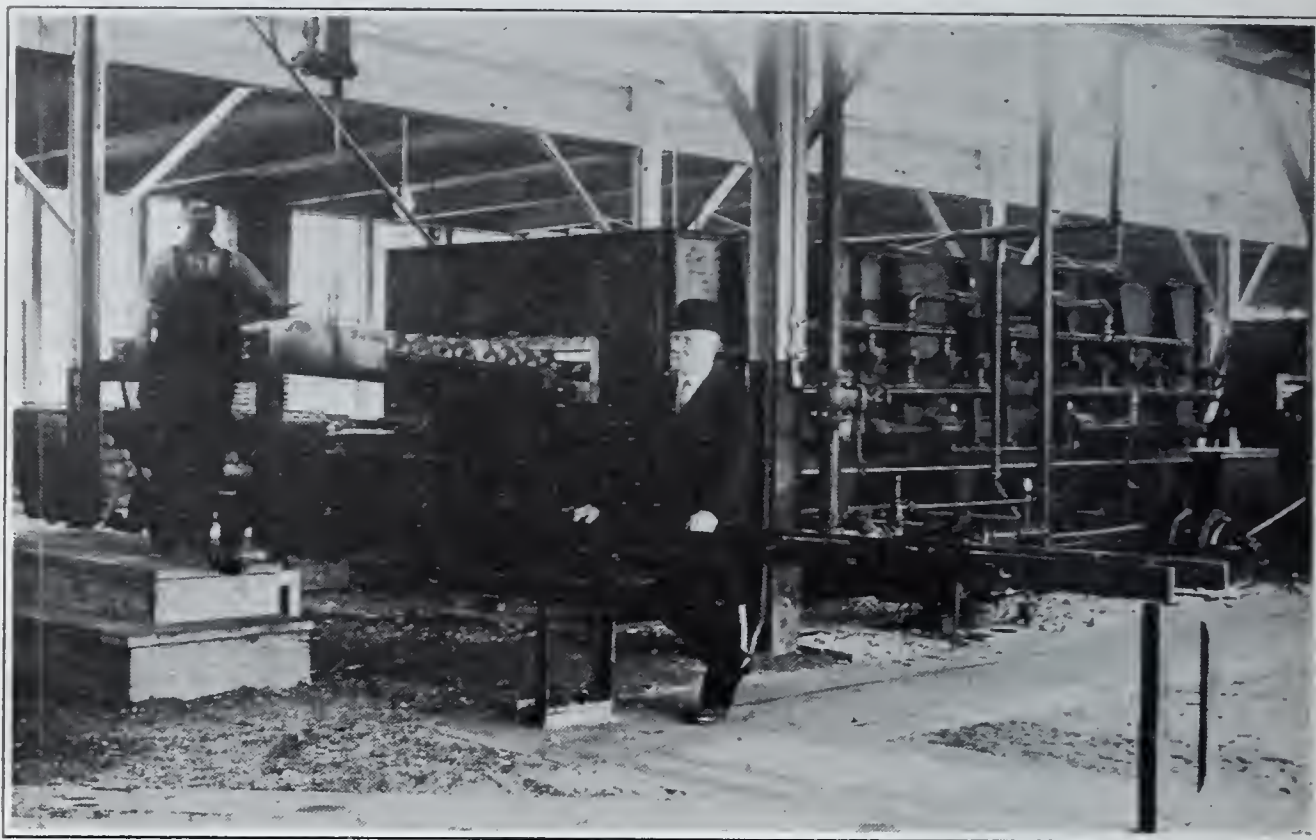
Automatic Surface Combustion Shell-Quenching Furnace.
